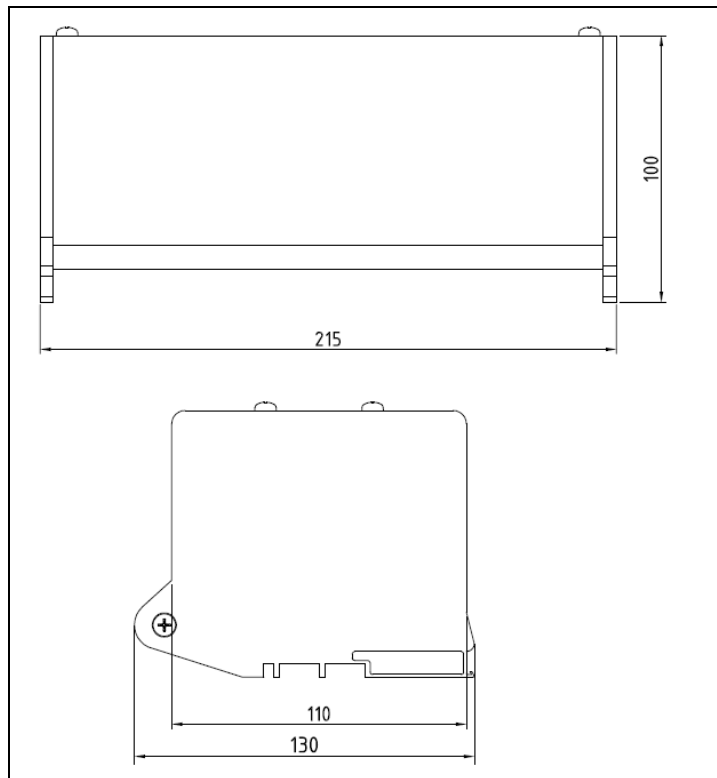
Dimensions FORCE-1.DIN and KEH.R
